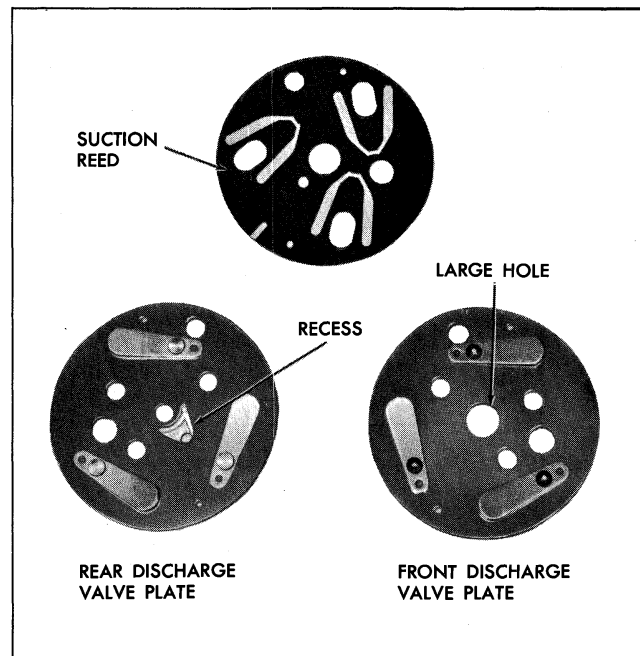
Identification of Front and Rear Discharge Valve Plate
